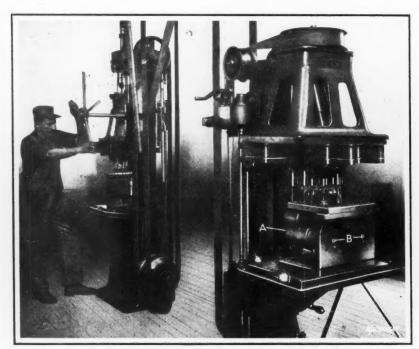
Multiple-spindle Machines equipped for drilling Detachable Type Cylinder Block
